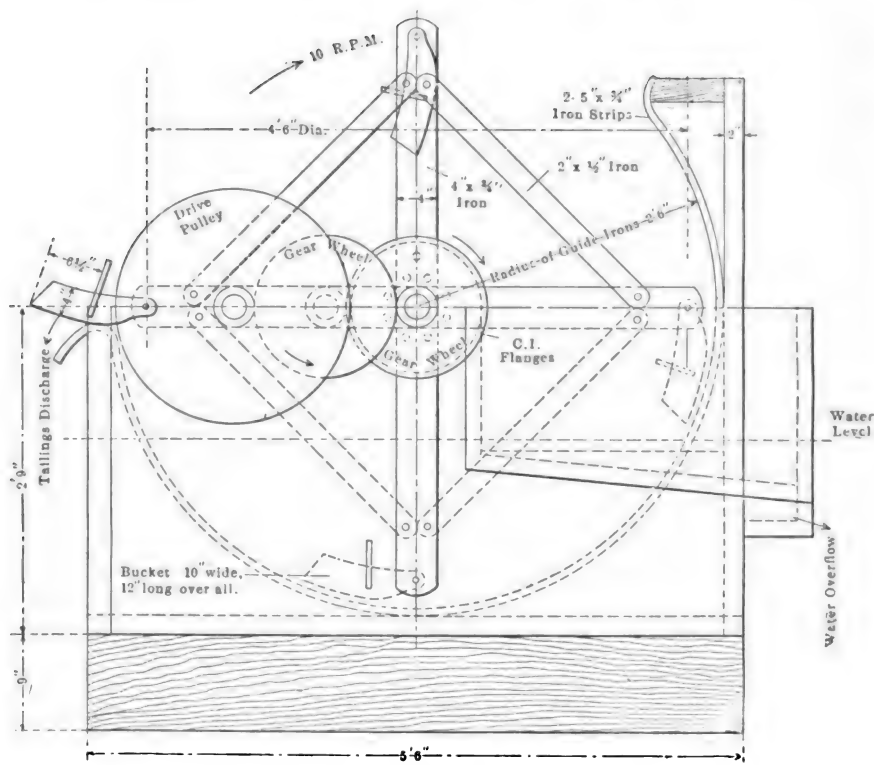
DEWATERER FOR JIG TAILINGS.
